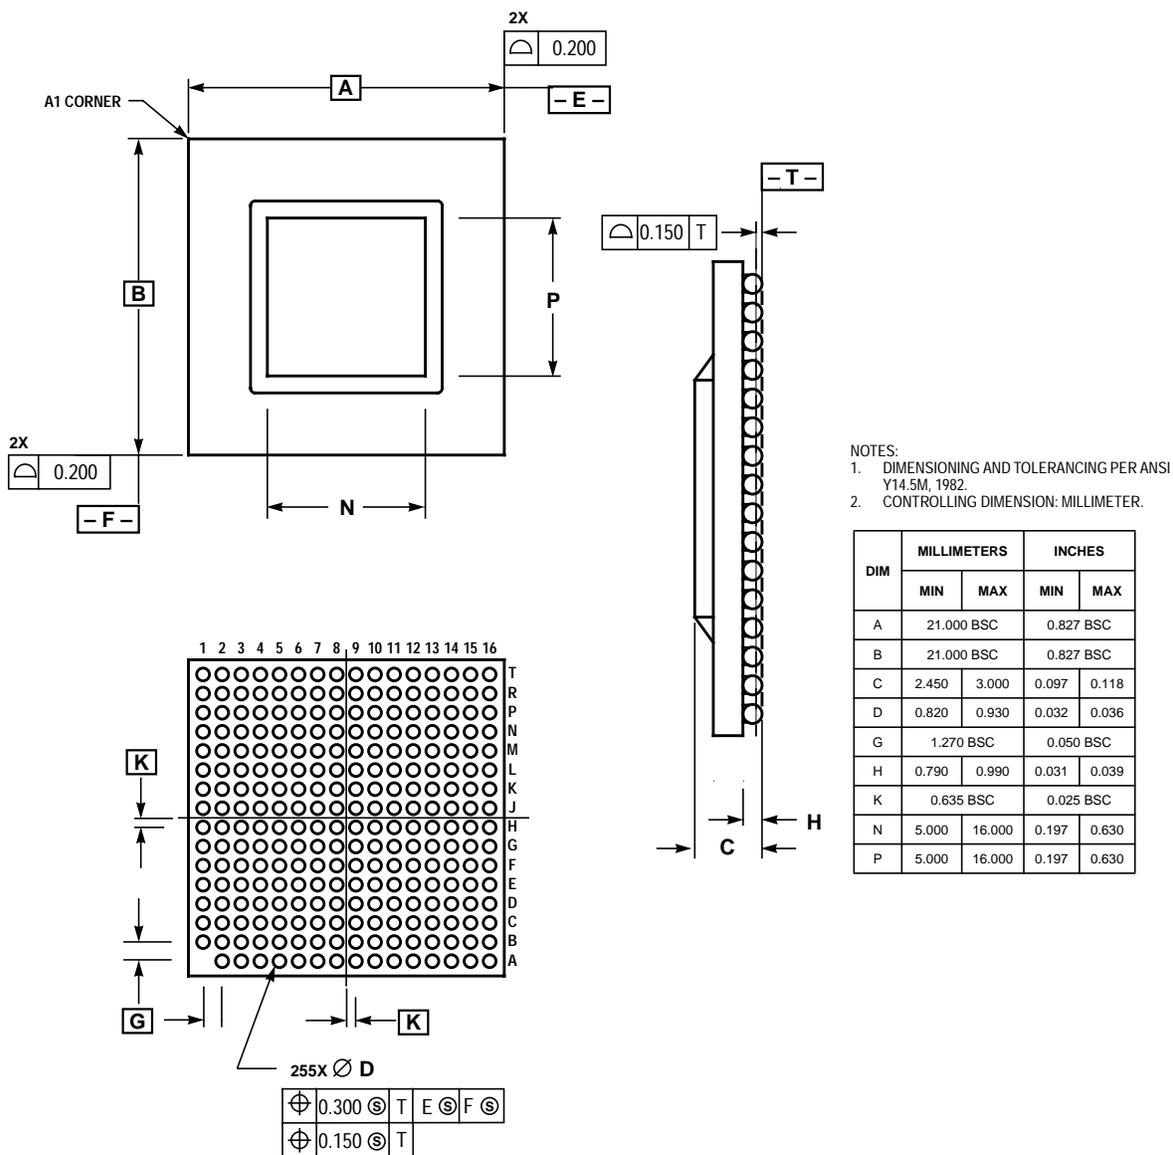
Mechanical Dimensions and Bottom Surface Nomenclature of the CBGA Package
